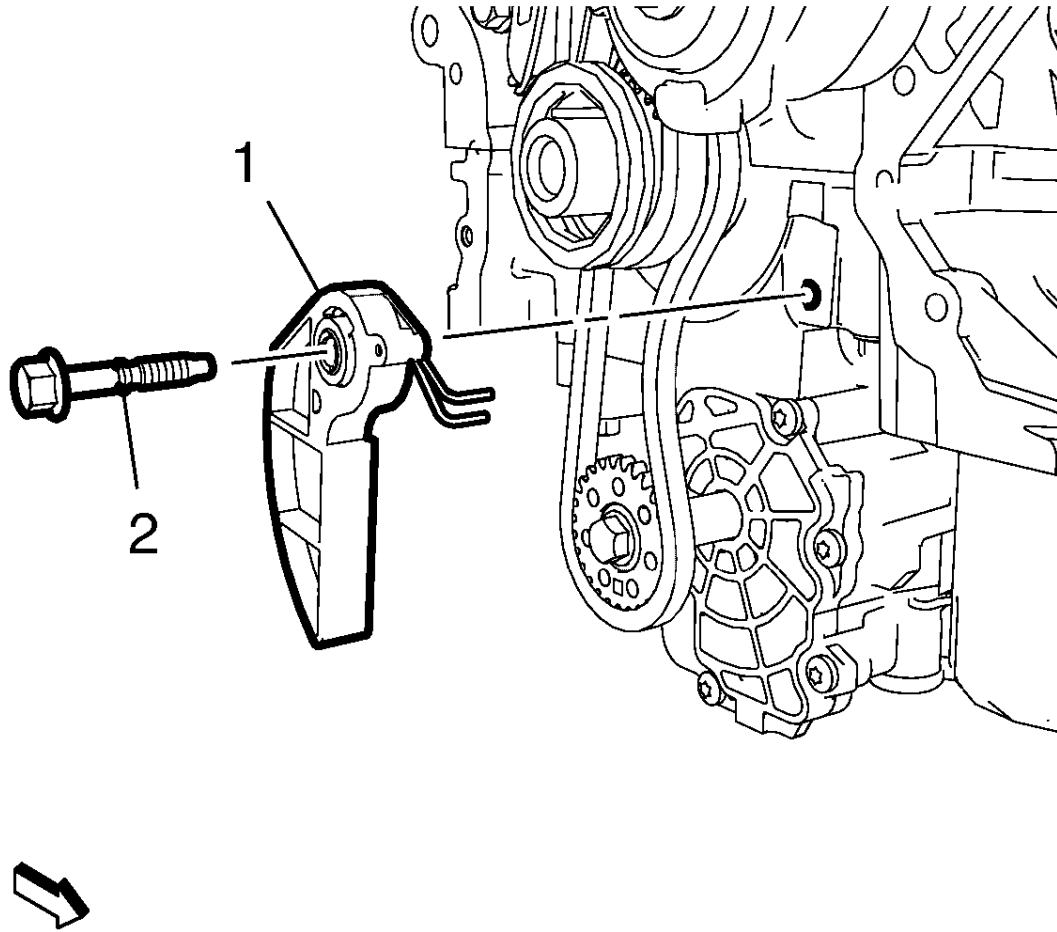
Oil Pump Drive Chain Tensioner And Bolt
